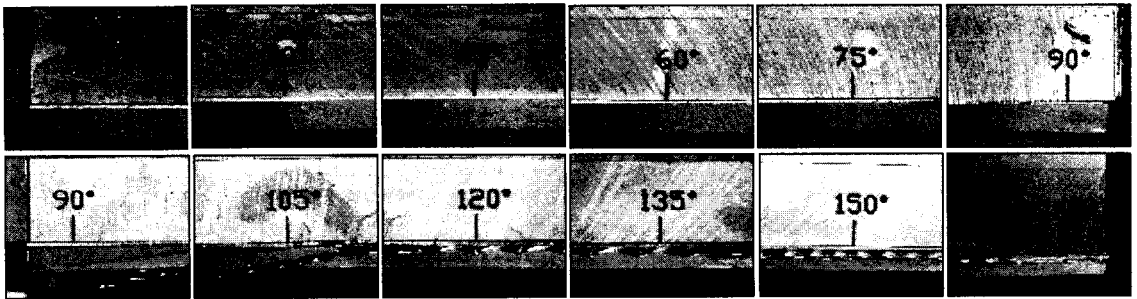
Burr formation in face milling (SM20C, Tool 1, F=0.1mm/tooth, V=150m/min, D.O.C=1.2mm)
